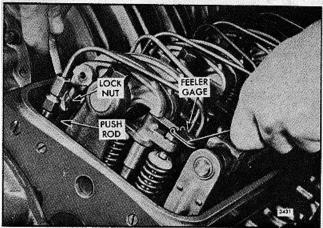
Adjusting Valve Clearance (Unloaded Valve Bridge)
